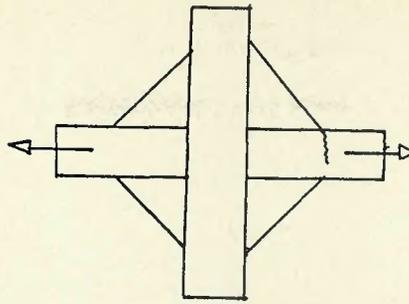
Load bearing fillet weld—large weld. If weld is large enough, fatigue failure occurs through plate—initiated at toe of weld. Porosity has no effect on fatigue strength
